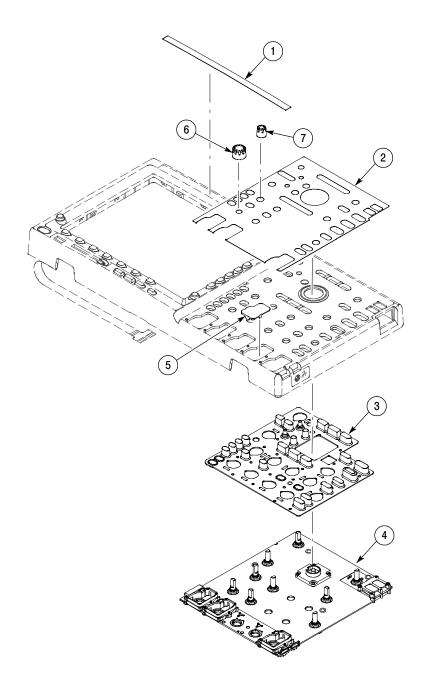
Exploded view: DPO4000 front panel and display, 2-channel instruments
